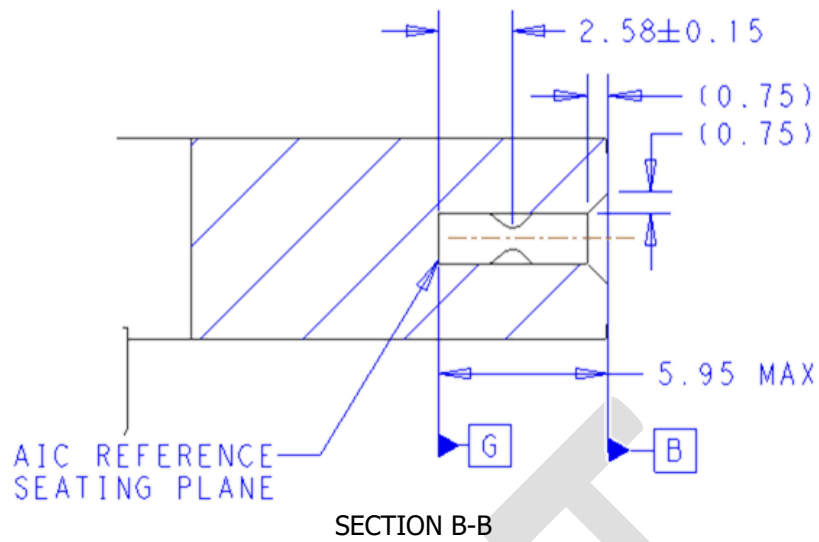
DETAIL B: RIGHT ANGLE ORTHOGONAL CONNECTOR SEATING PLANE DIMENSIONS (MM)
